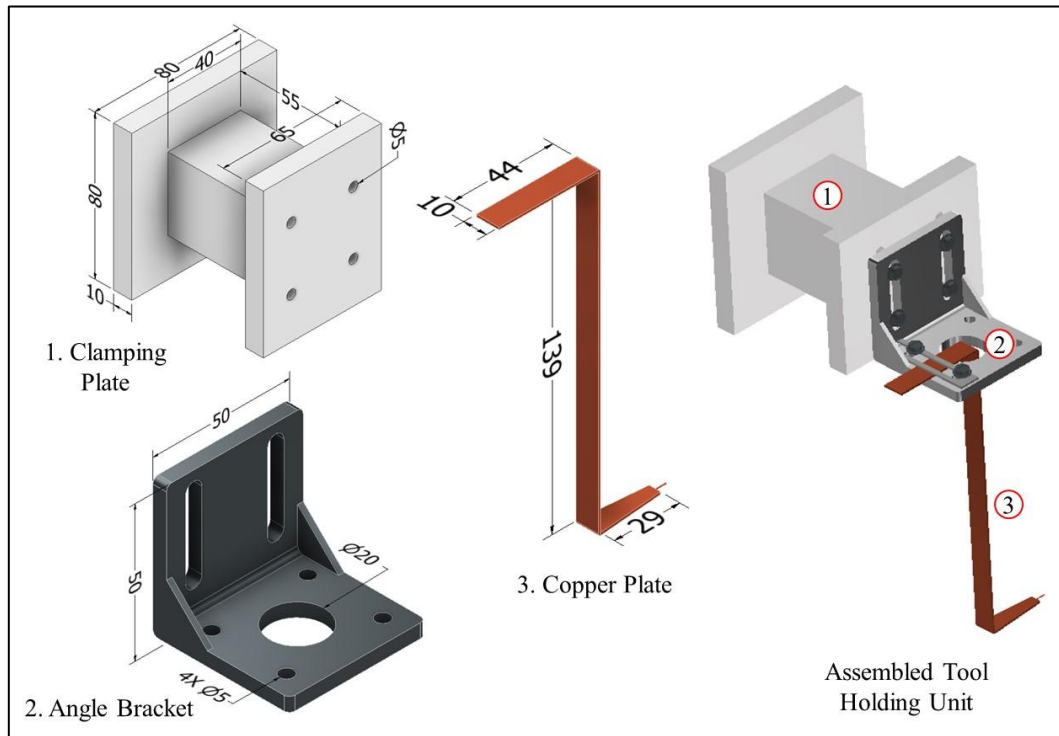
3 Elements of the tool holding unit with dimensions and assembled form
